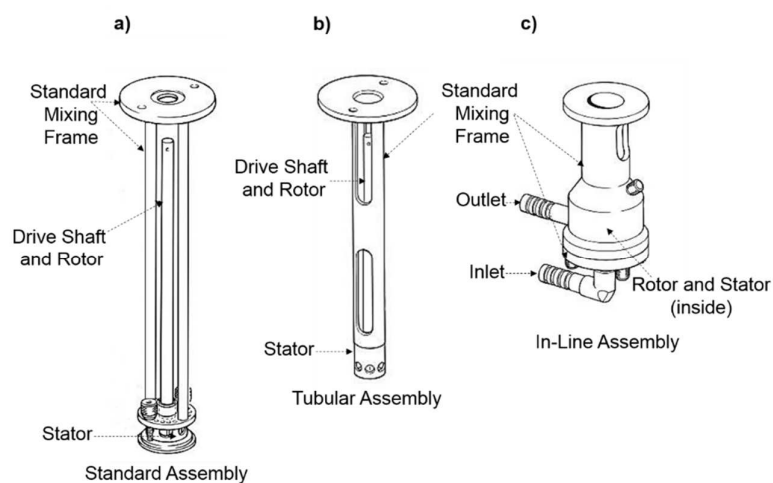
Schematics of different mixing assemblies; a) Standard assembly; b) Tubular assembly; c) In-Line assembly. Illustrations from Silverson L4RT High Shear Mixer Operating Manual (Silverson Machines Ltd.)
